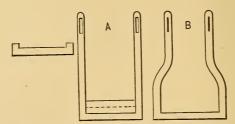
Equalizer Gib Remover for Consolidation Engines.
